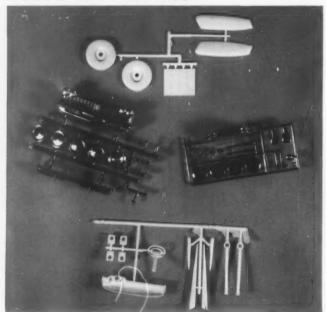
Multipart tooling. Variety of parts for automobile model produced in one molding. Center parts have been vacuum-metallized after molding.
